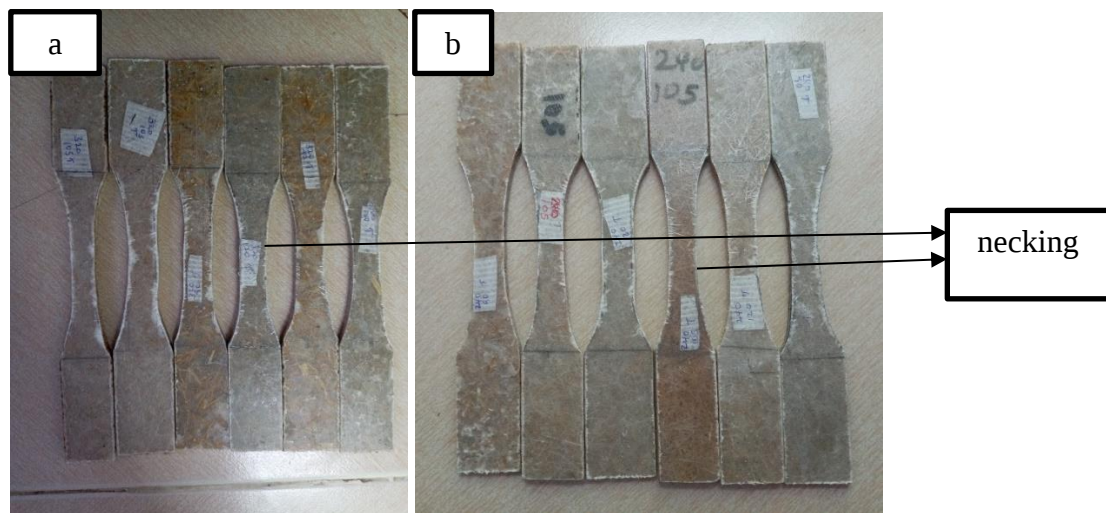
Tensile test specimens (a) front side (b) on the back side
